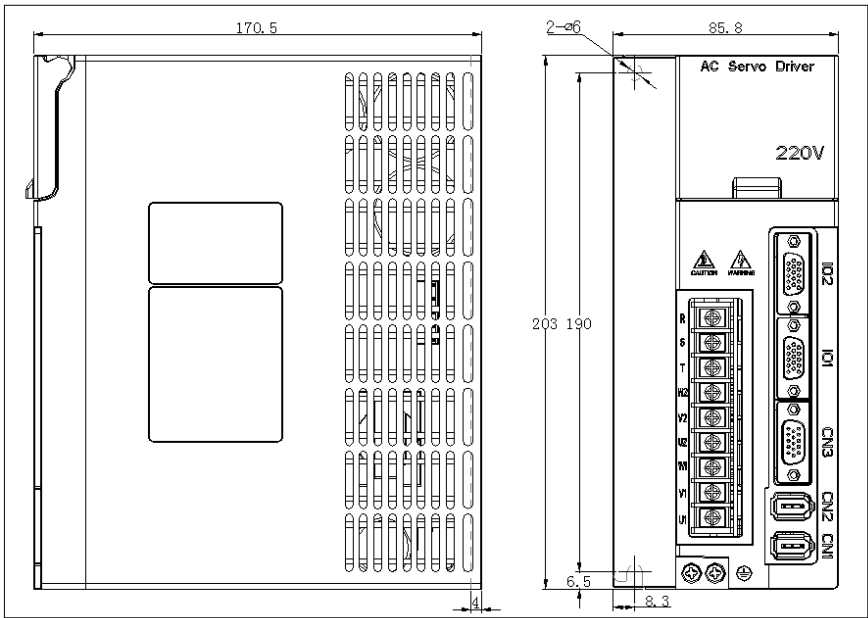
SDV202NK5 Servo Drive Installation Dimension Drawing
